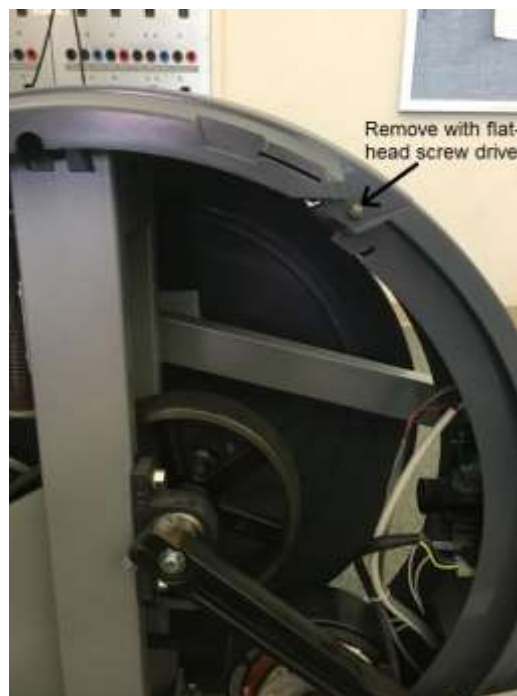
Photo of the back of the protective housing. Remove hex key screws with 4 mm or 5/32 in. to remove side panels.
